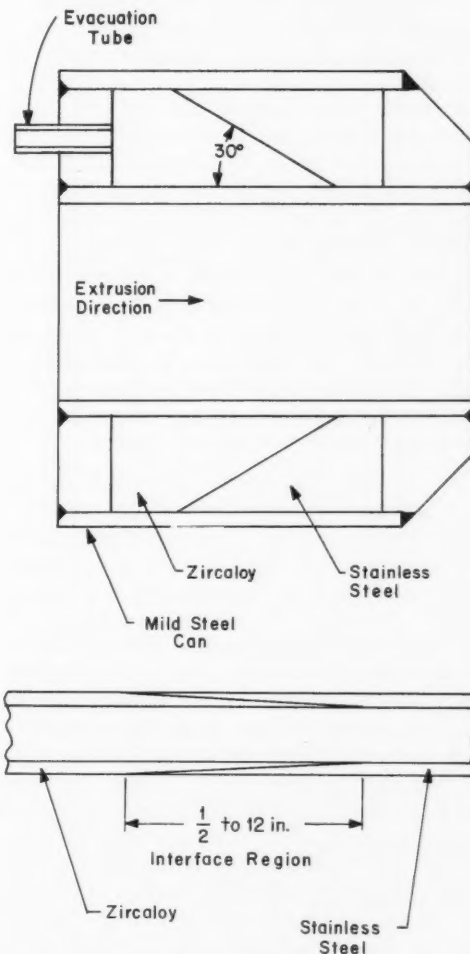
Composite billet before tandem extrusion (above) and finished coextruded joint with protective can removed (below).¹⁶
